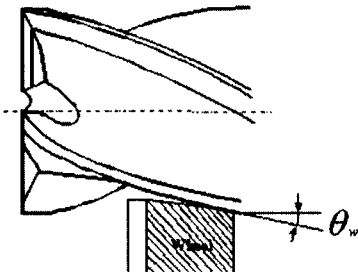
Method of generating an eccentric clearance surface by grinding tool.
